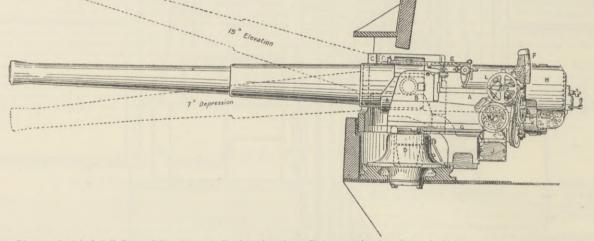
Diagram of a 6-inch Q.F. Gun and Mounting. A, Bracket of carriage; B, trunnion bearing; C, 3-inch shield; D, pivot piece; E, bar and drum sight; F, shoulder-piece; G, web-plate for supporting battery box; H, protecting shield; J, electric firing battery box; K, breech ring; L, training wheel.
